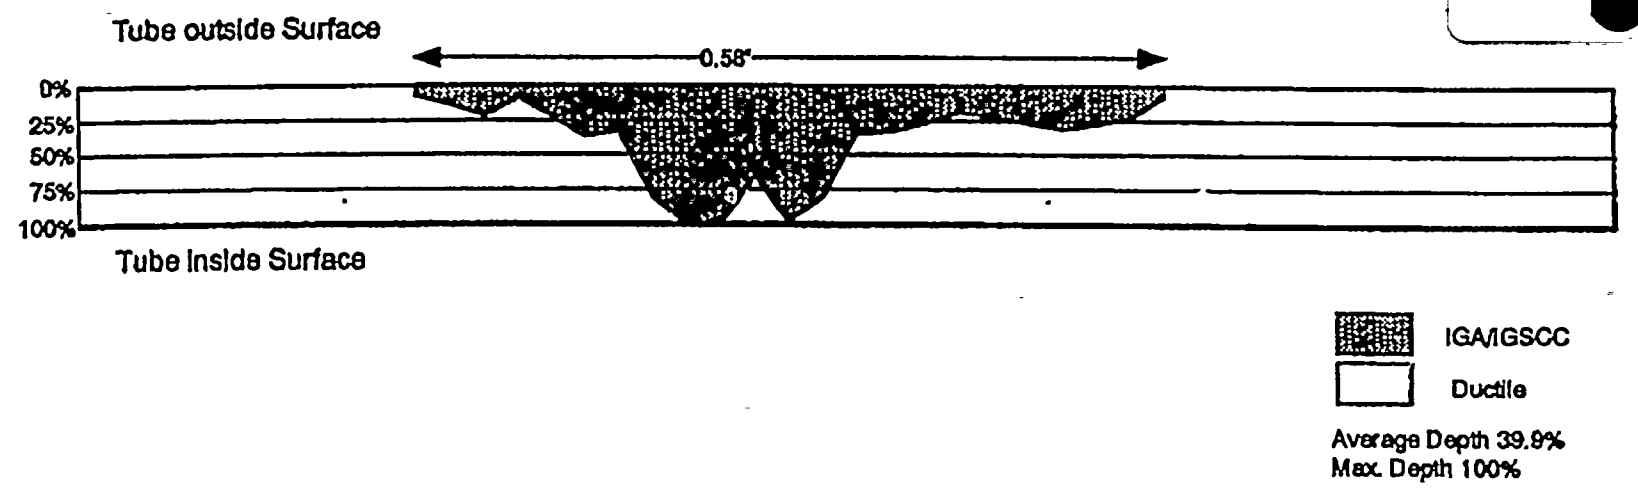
Steam Generator 22 Tube R127L140 Section 13 Burst Face Crack Depth Diagram.
